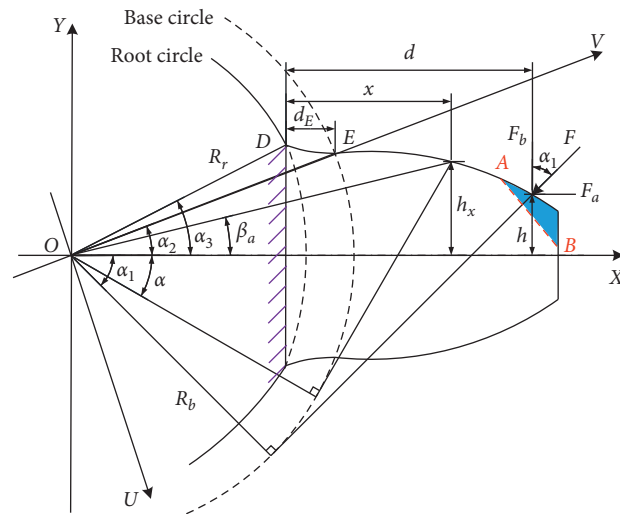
Cantilever beam of spur gear with tooth tip chipping.
